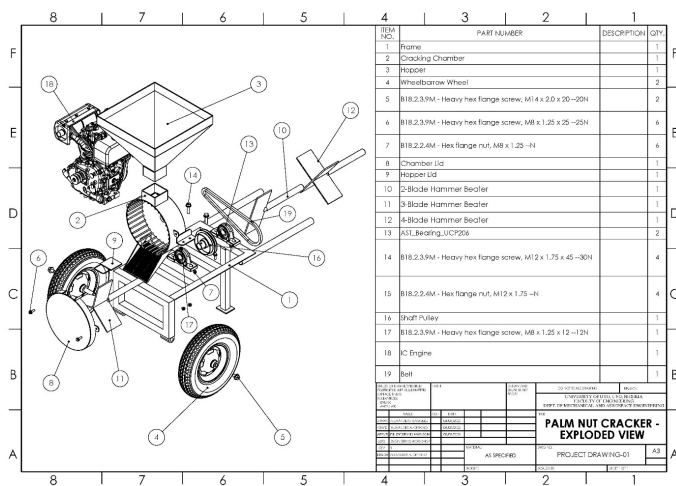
Exploded view of model components of the developed palm kernel nut cracking machine
